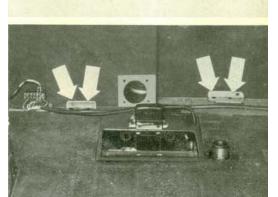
Slacken adjusting nut for hand brake, lift out the cable, remove slotted bolt and push cable through in rearward direction.
